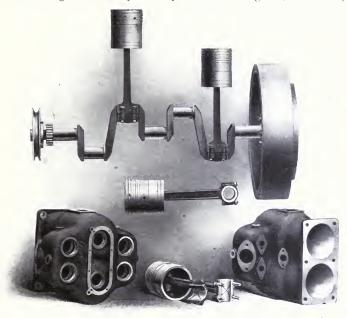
Disassembled Motor of Packard Car, Showing Cylinders, Pistons, Connecting Rods, Crank-Shaft, and Fly-Wheel. Cast-in-Pair Type of Cylinder Construction. Packard Motor Car Company, Detrolt, Mich.
